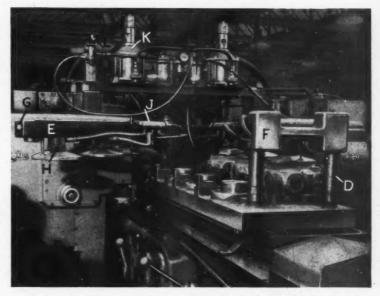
The set-up on a Cincinnati duplex machine for milling the feet on six main pump bodies at one setting. The fixture has air-hydraulic clamping arrangements
